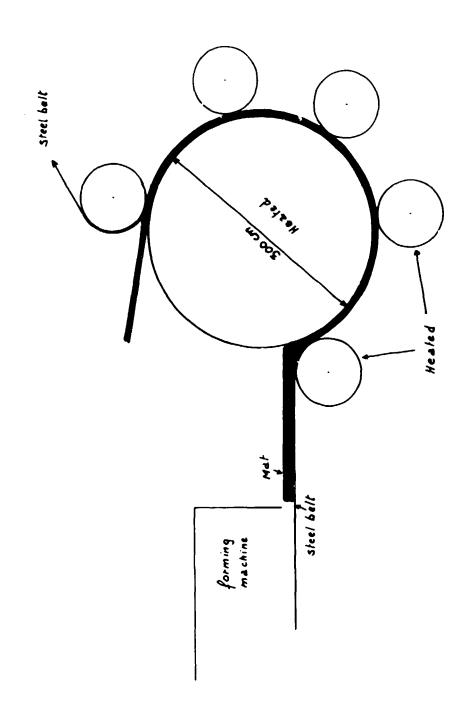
Schematic drawing of the pressing cylinder in the Mende process.
